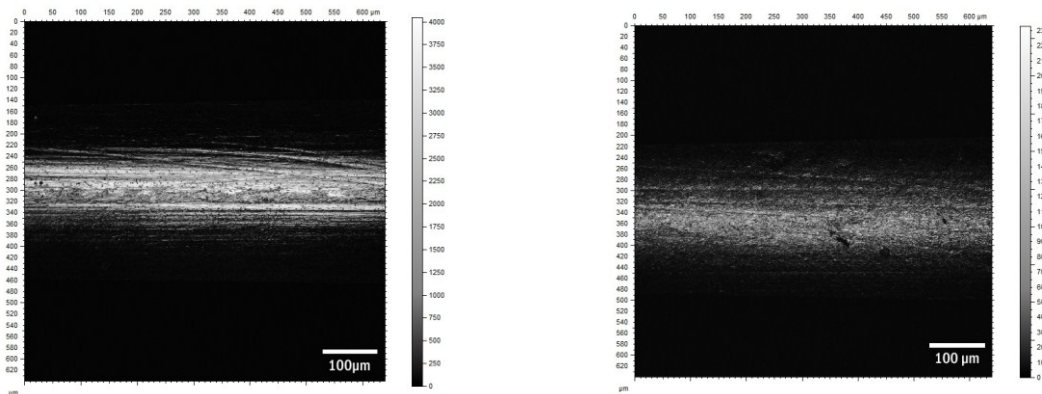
Thread crests of die A5. (Left) New thread. (Right) Used thread.
